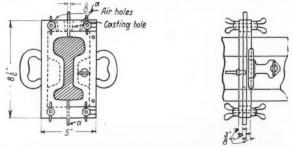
, Mold Used for Making a Plaster or Wax Cast
